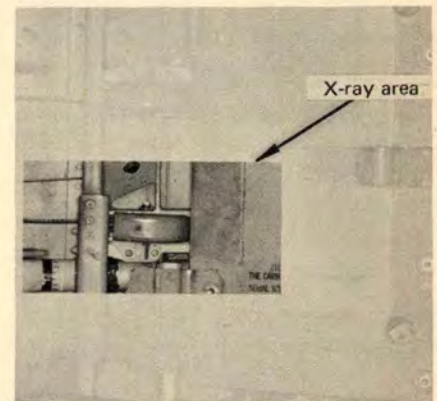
, Rudder Cable Pulley Housing With Ejection Seat Removed
